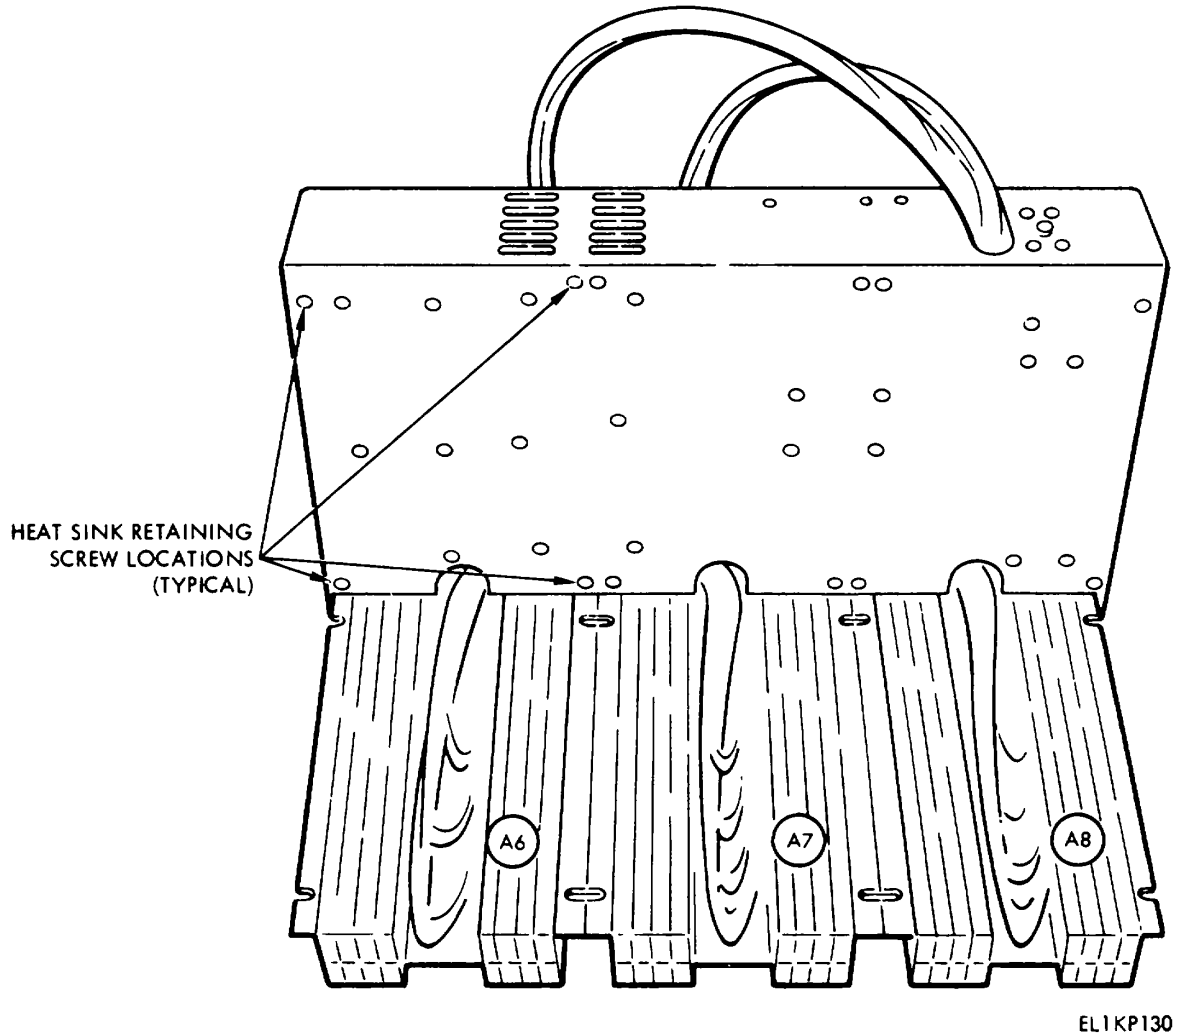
Bottom of power supply chassis with heat sinks folded out
